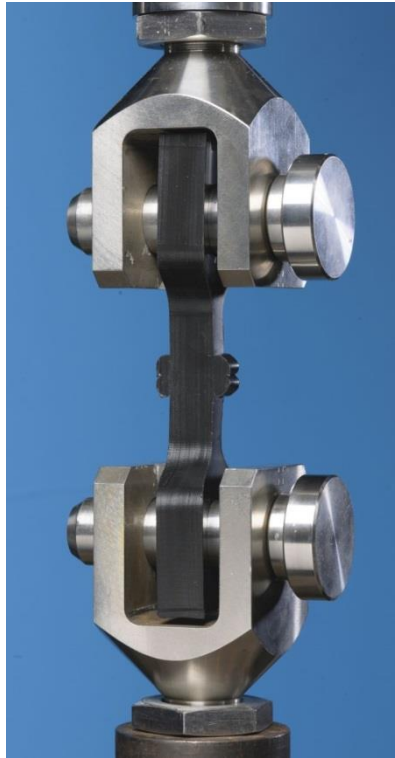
High speed tensile impact test specimen set-up inside the testing jig (TWI, 2016)
